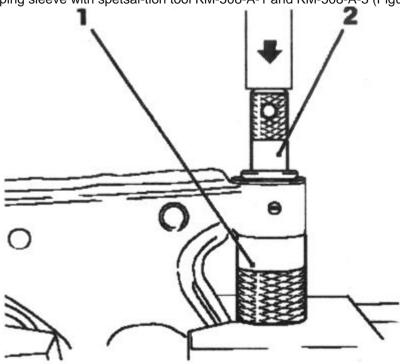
Extrusion front dem-pfiruyuschey Bushings: 1,2 - special tool
